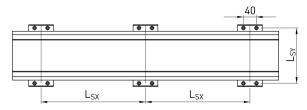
Mounting with clamping profiles - HT200L, HT250L
